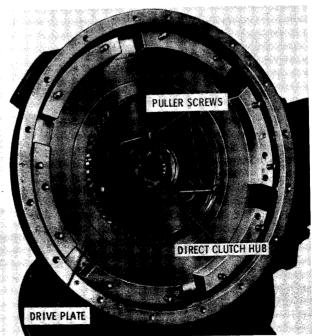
Removing clutch drive plate and direct clutch hub (VH series)
